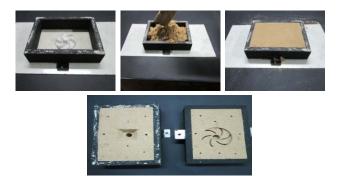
Mold fabrication using resin binders supplied by Gargi Industries
